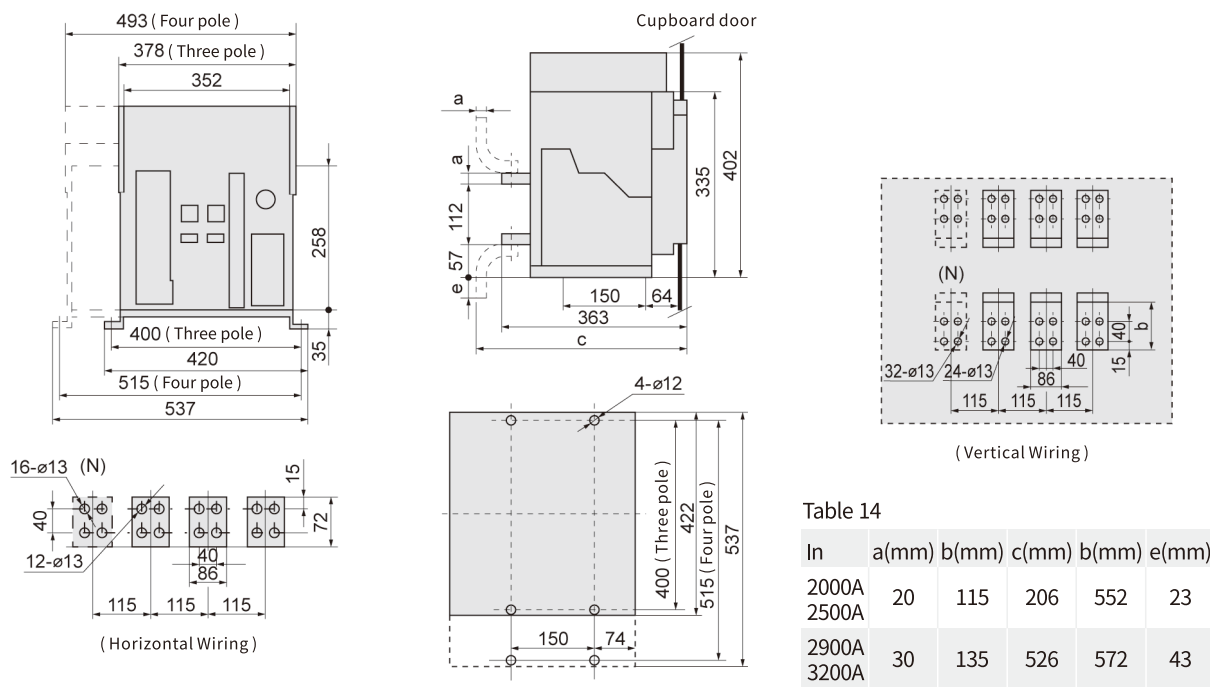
Outline and installation dimensions of fixed type circuit breakers (EKA1-3200, 3200/4)
